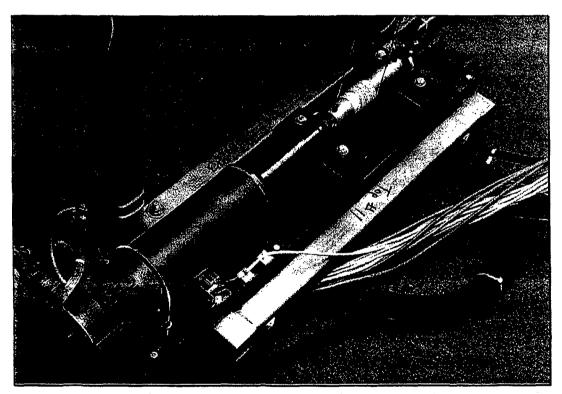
Lower left side of manipulator frame showing y-axis drive components.
